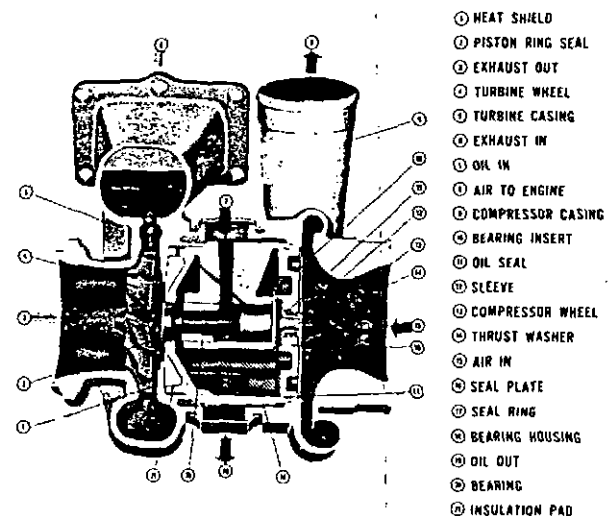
, AWC 6. Turbocharger exhaust gas and air flow
